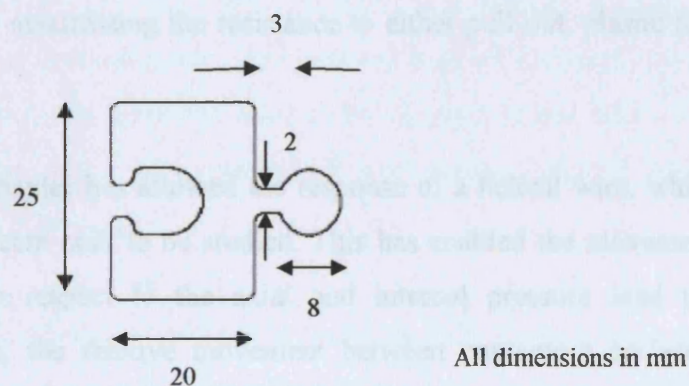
Dimensions of Omega cross-section used for tensile testing
